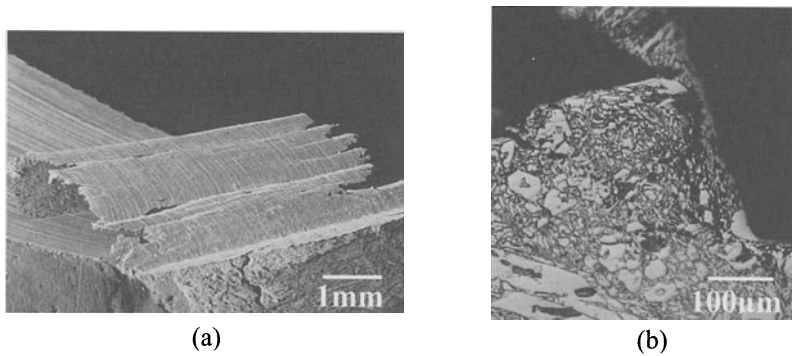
Quick-stop chip produced when milling hardfacing with PCBN;
